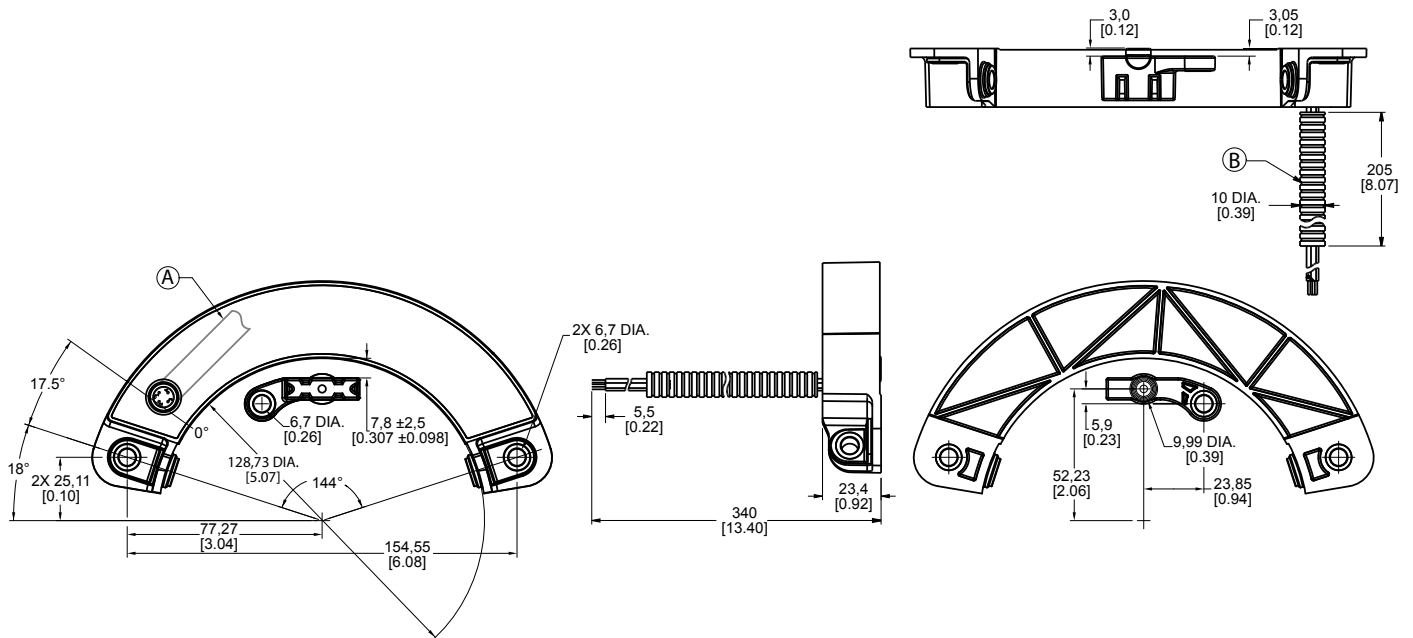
Dimensional Drawings (For reference only: mm/[in].)
